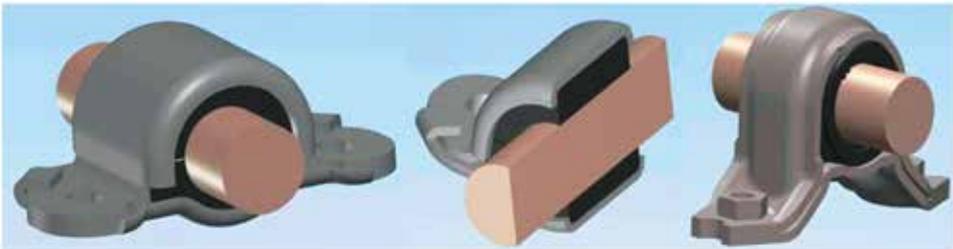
Example of bearing for stabilizer bar – clamp bearings
